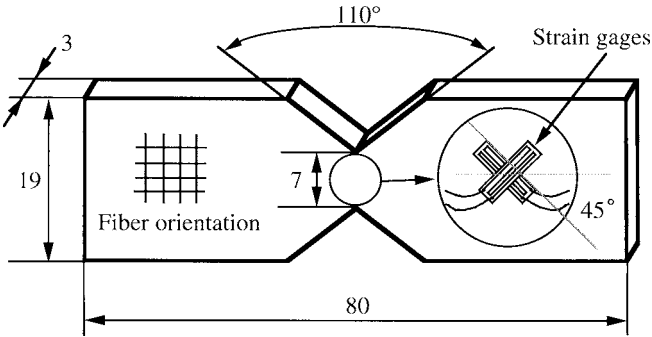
Shape and dimensions of Iosipescu-type specimen.
